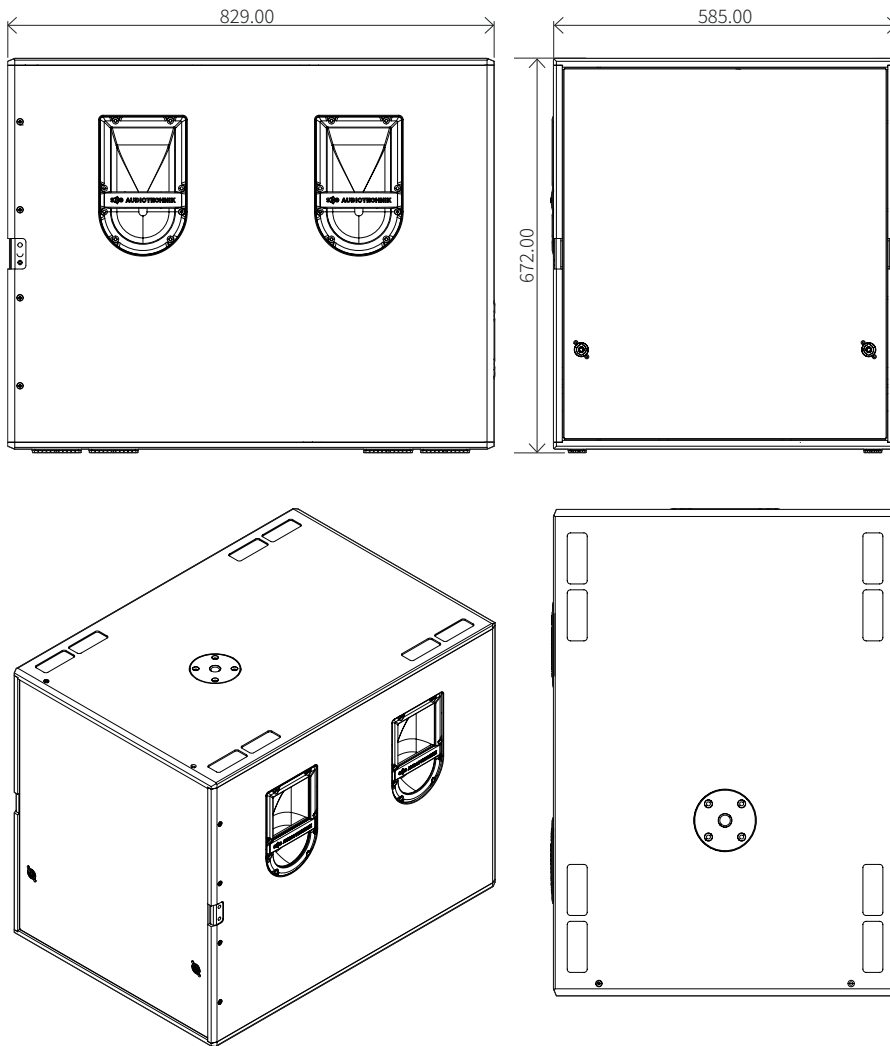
B 21 views and dimensions. Annotations given in millimetres.
